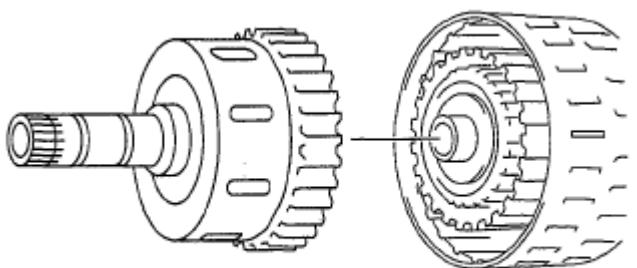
Identifying Thrust Needle Bearing On Clutch Hub
